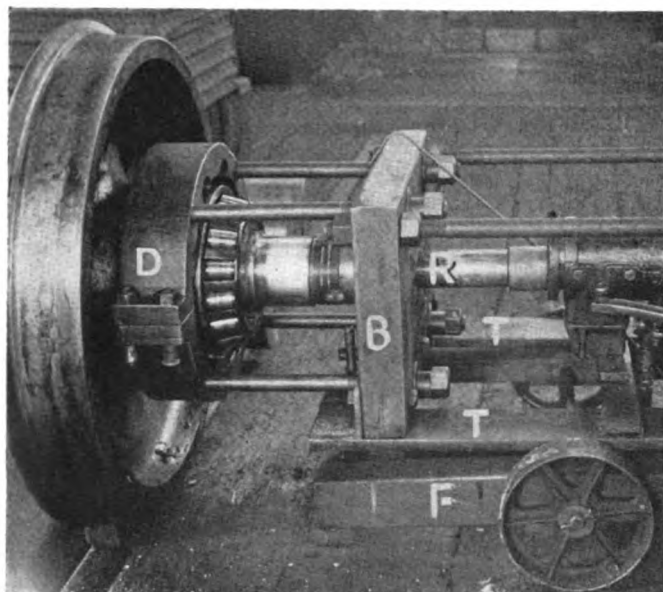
Close-up view showing the puller, as equipped to remove the Timken inner cone without pressing off the car wheel
